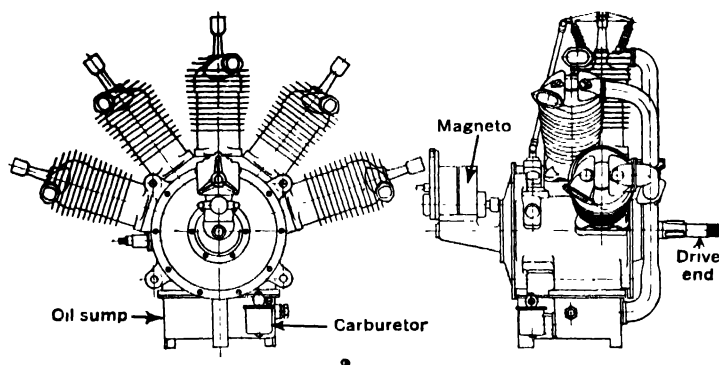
The R.E.P. Fan Type Motor Had Five Air-Cooled Cylinders Spread Out as Shown Above the Crankshaft.
